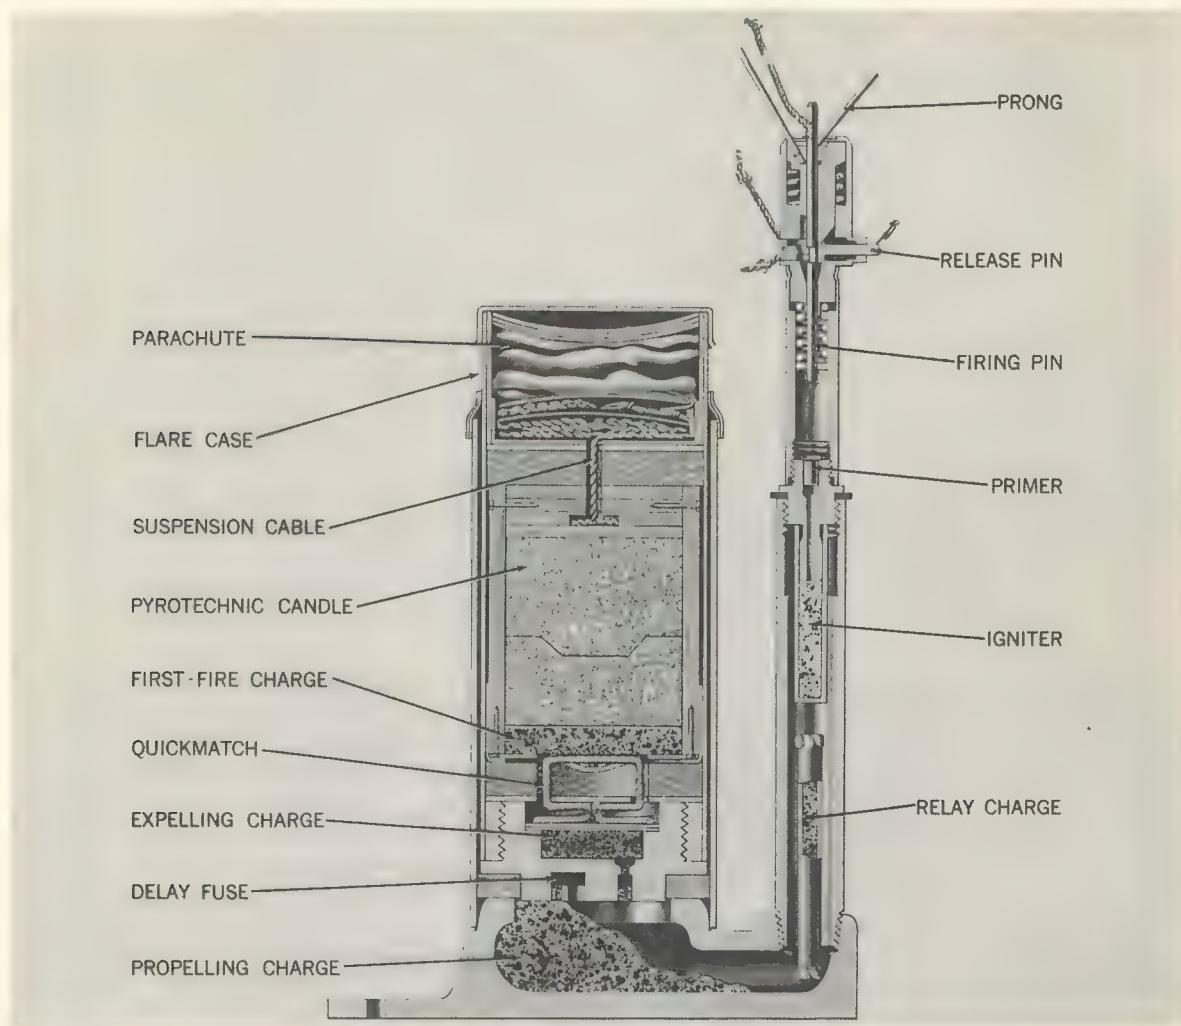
Trip Parachute Flare M48, Cross Section.
